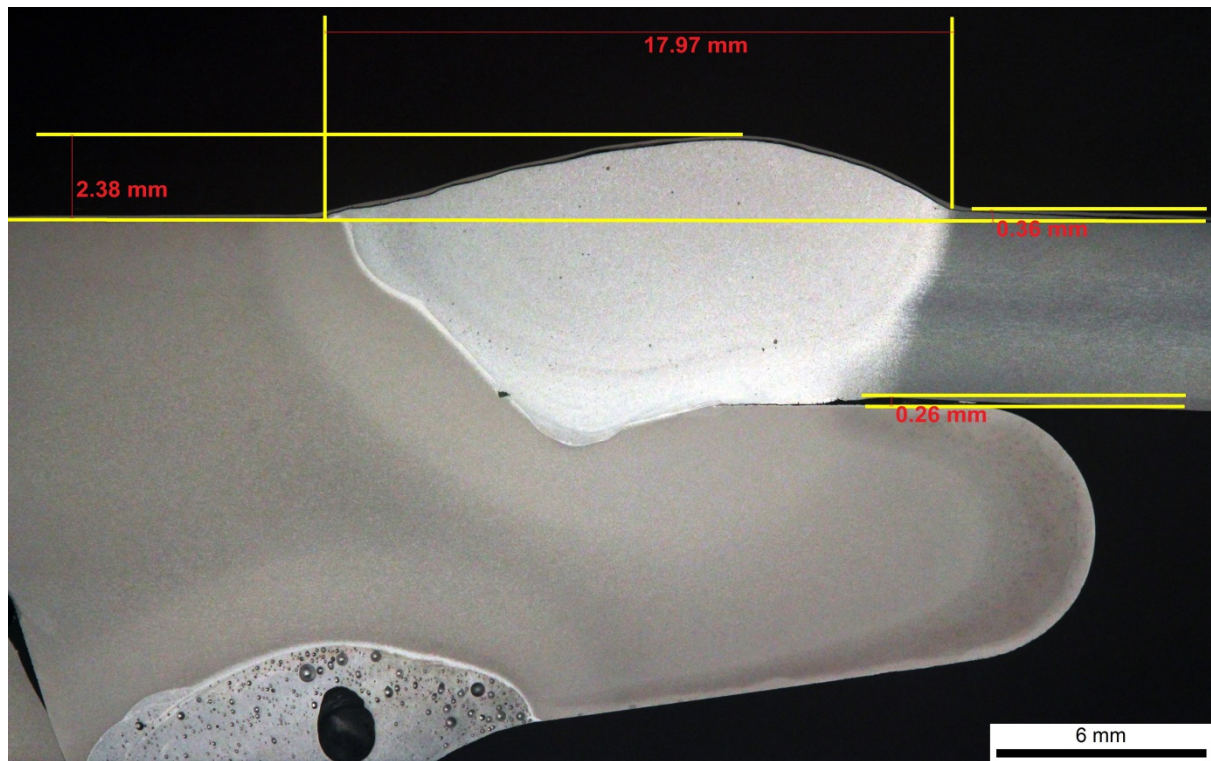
J3564 sample W03-04, slice 1, right side of Figure I30. Small lack of sidewall fusion defect present. Large gas pore in fillet weld between bulkhead and extrusion band.
